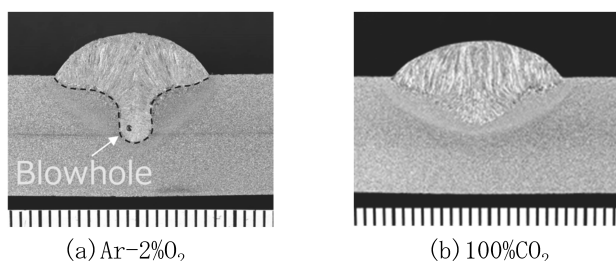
Difference in penetration shape due to shielding gas (300 A)
